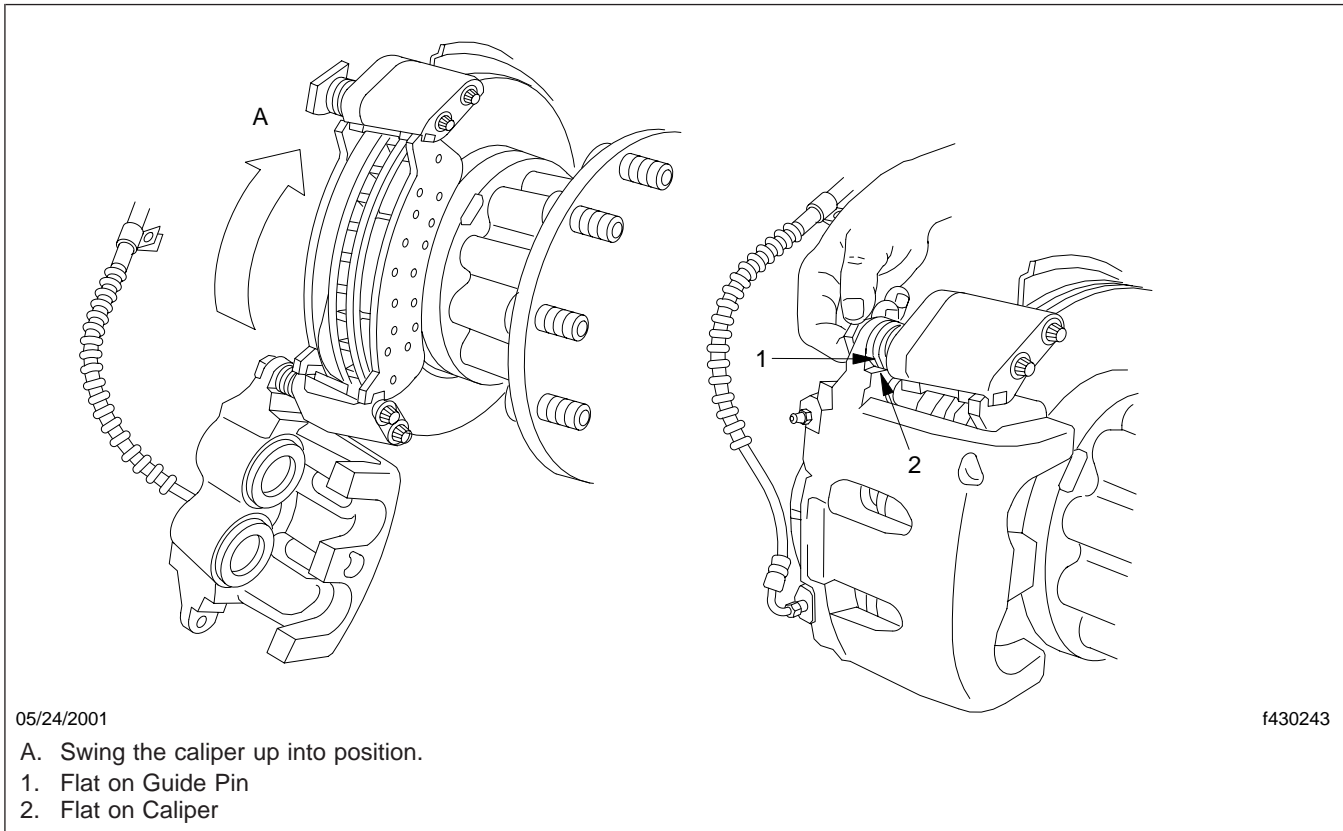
, Rotating the Caliper Over the Brake Pads and Rotor
